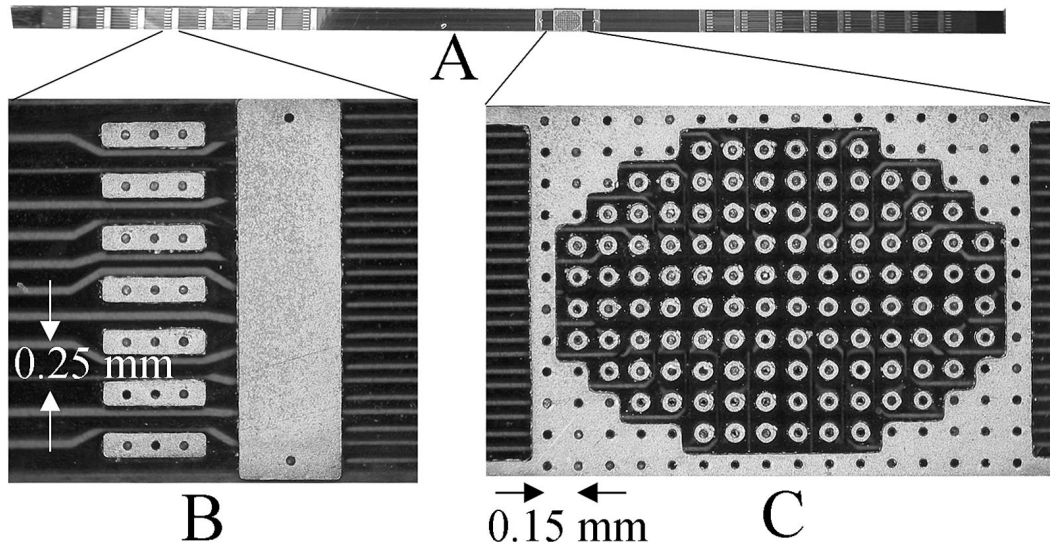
(A) Photograph of completed flex circuit. (B) Close-up of solder pads spaced 0.25 mm apart, (C) close-up of array pads spaced 0.15 mm apart.
